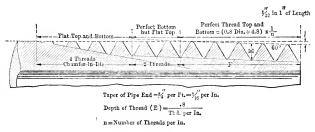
Longitudinal Section of Briggs Pipe Thread
